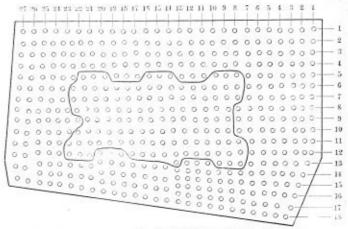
Serpentine Patch Welded in Right Side Sheet
